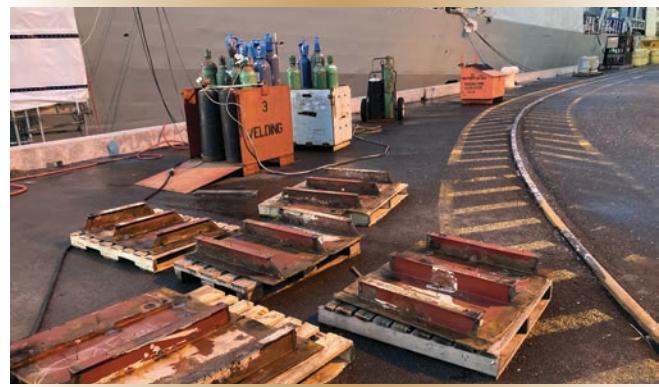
Rather than attempt to salvage short sections of longitudinal, complete sections of shell plating and longitudinal were cut away.
